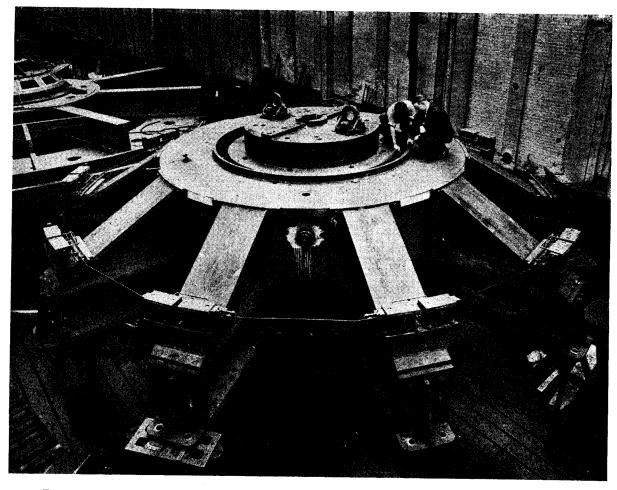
Typical Bearing Bracket of an Umbrella Generator Showing the Shaft in Position and the Brakes Mounted on the Bracket Arms.
